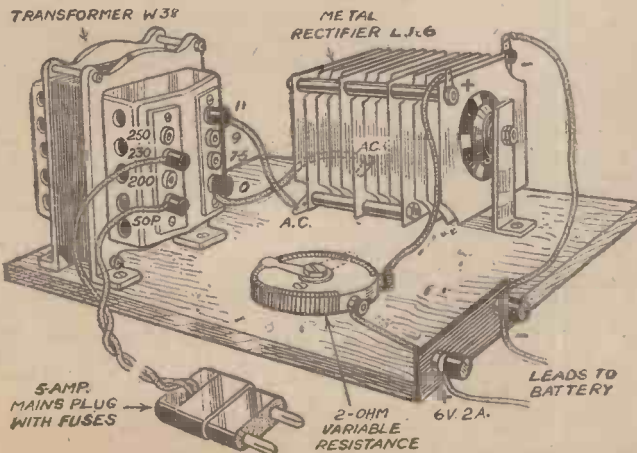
Constructional details for a simply and easily made charger, using standard components. The slider is connected to the right-hand terminal.
